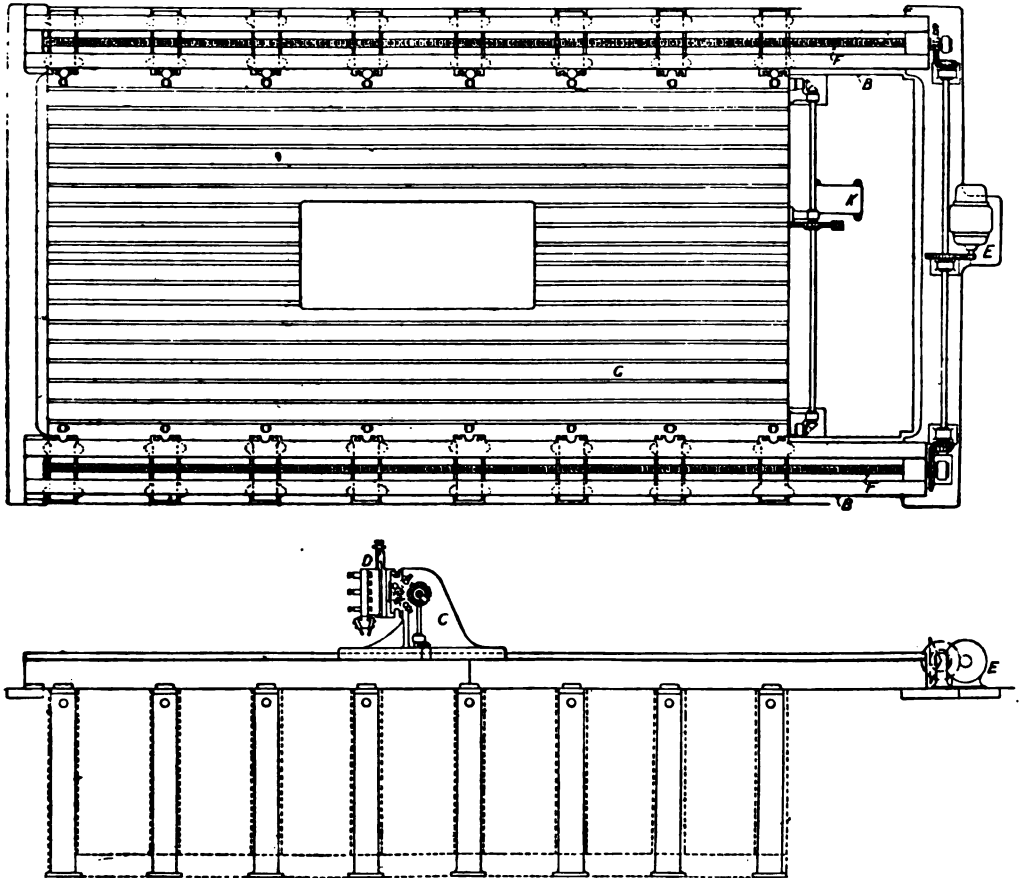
Pit Planing Machine. (Plan and Side Elevation.)
